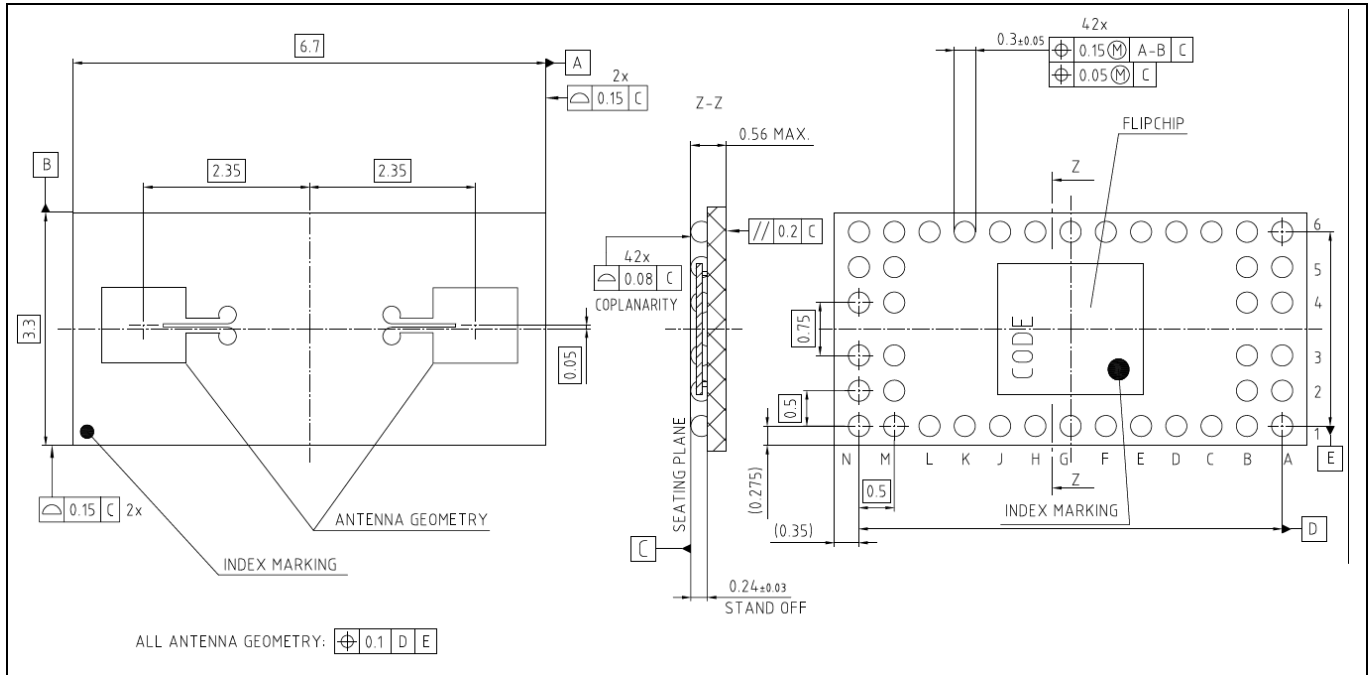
Top and side view of the BGT60LTR11AIP MMIC package – all dimensions in mm
